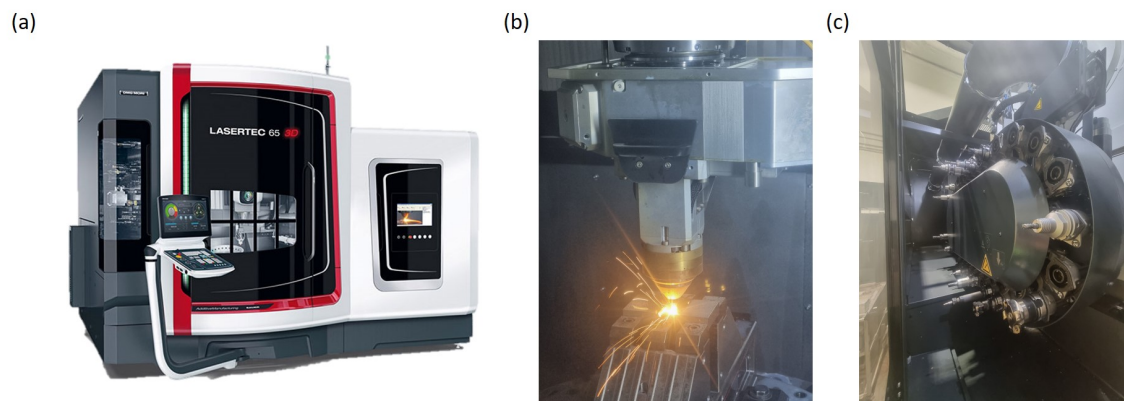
Overview of (a) the DMG Mori LaserTec 3D hybrid, (b) the tool holder with the laser projection nozzle during deposition and (c) the tool magazine.
